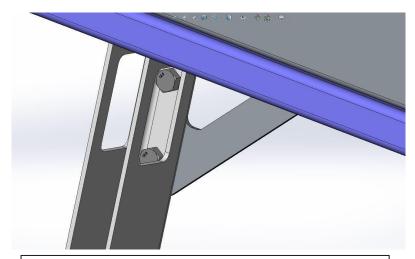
Place 2 Hex bolts from the opposite side where we just drilled, through the drilled holes
